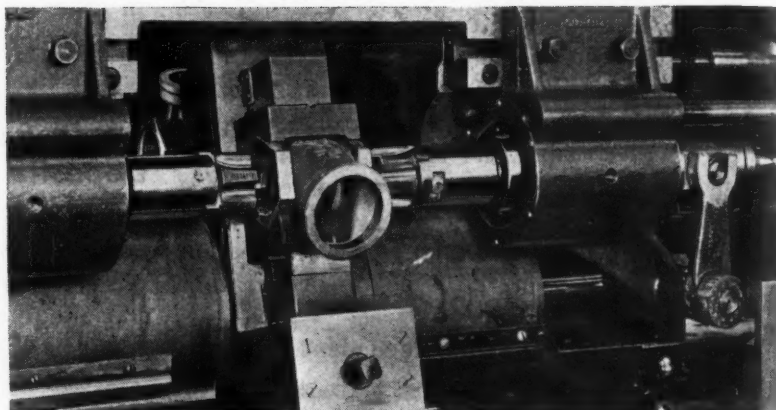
Close-up View of Third-position Spindles of New Britain Chucking Machine, Equipped for Tapping Threads in Brass Valve
